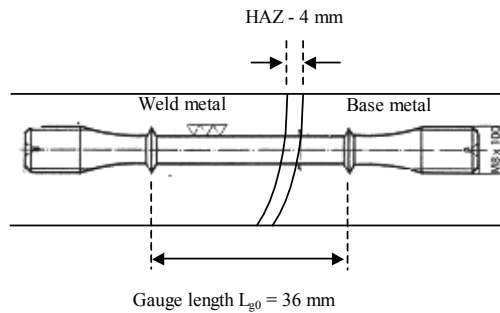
Location of weldment specimens in the welded joint
